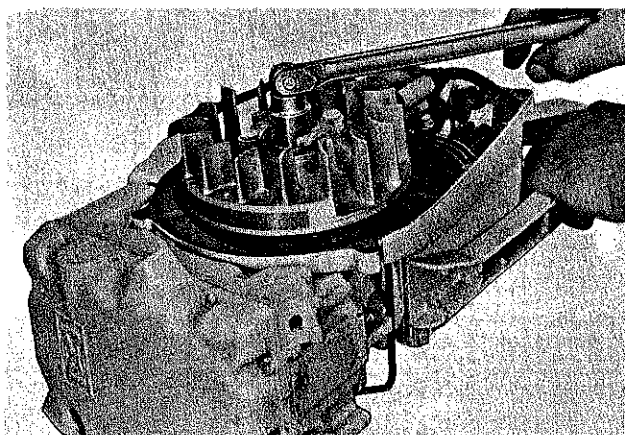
Removing the flywheel nut, with the flywheel locked against rotation. The locking pin fits into a cut-out on the flywheel rim.
